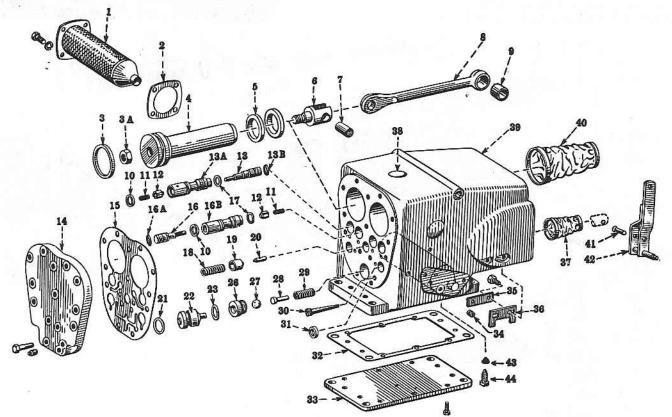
Exploded view of series A and C-hydraulic cylinder and valves unit.
